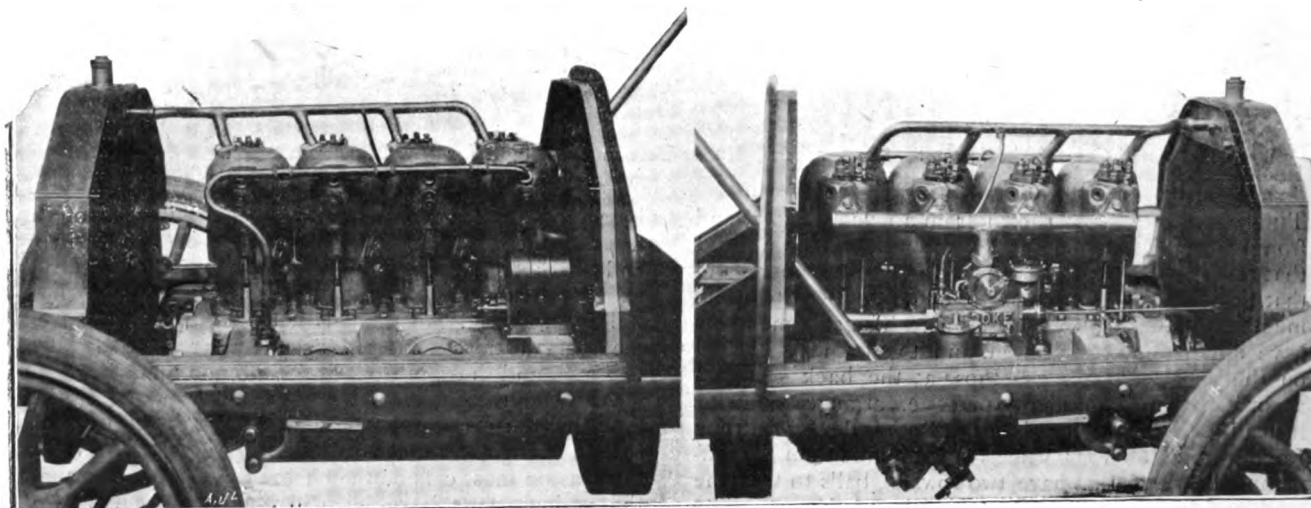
Side view of the 35-h.p. Brooke Chassis.
